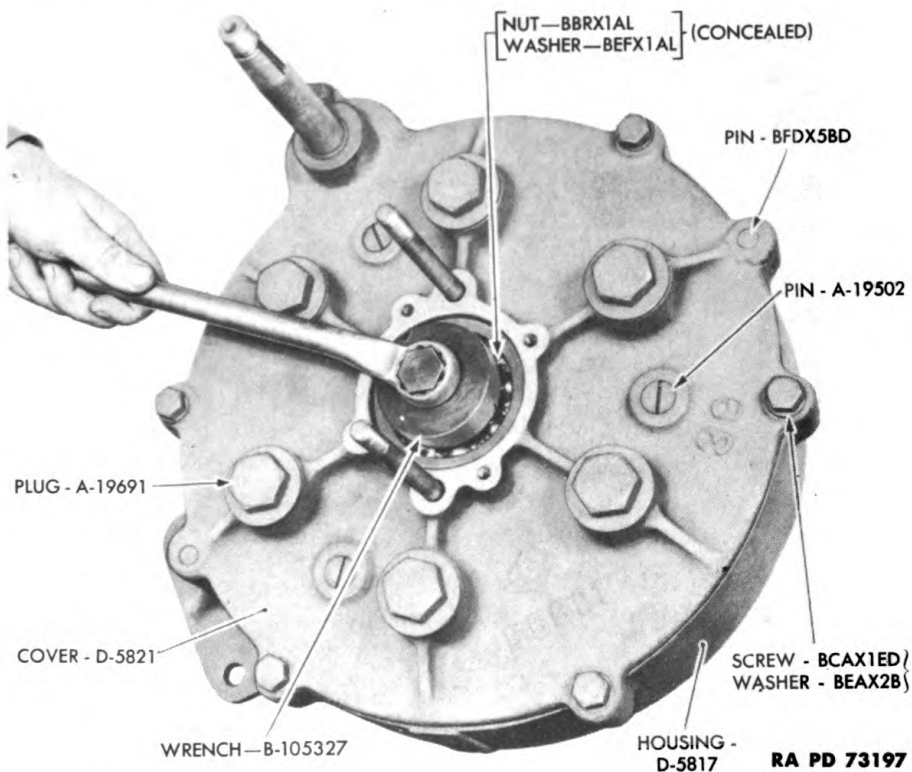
Removing Nut and Washer from Elevating Brake Drum Shaft
